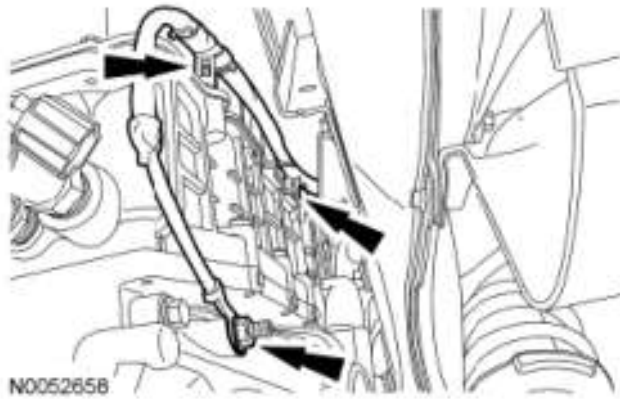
Locating Harness Fasteners, Nut And Ground Cable
